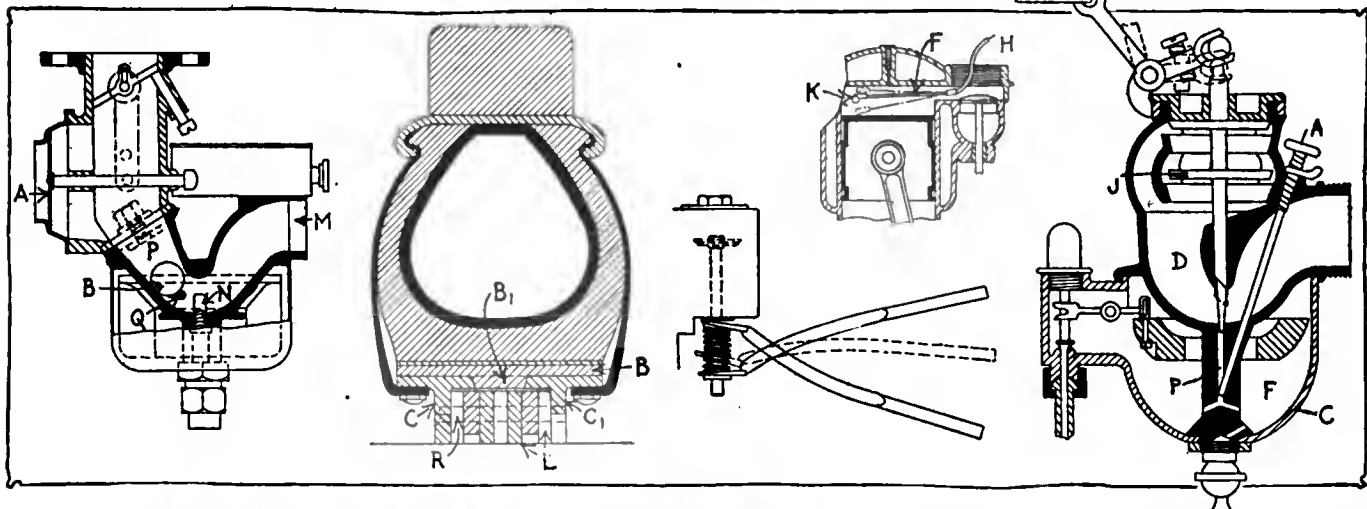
Dayton carbureter. Fig. 2—Barry tread. Fig. 3—Calvert engine cleaner. Fig. 4—Nyberg tool. Fig. 5—Daellenbach carbureter
